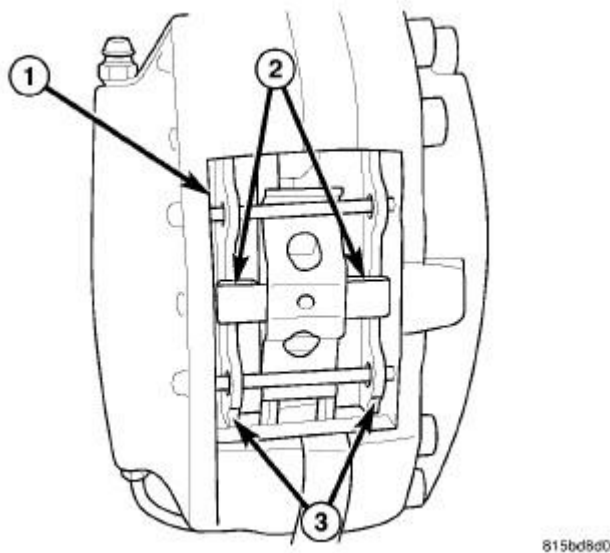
CORRECTLY ASSEMBLED PADS IN CALIPER
